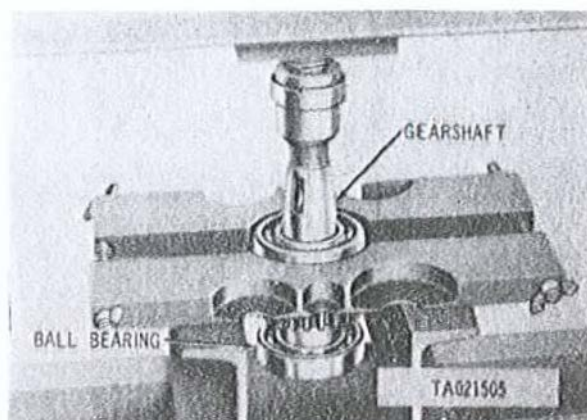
Pressing starter driven gearshaft from ball bearing.
